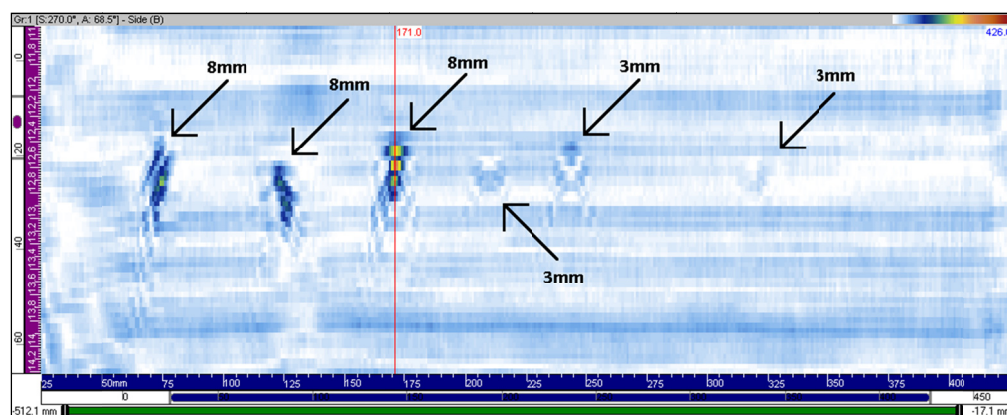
The B-scan image shows the recorded data over the length of the weld. Five aluminium discs with different diameters were placed in the weld. All aluminium discs were detected.
